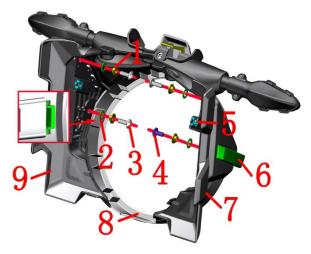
FRONT FORK		Head and headlights component 3	CHK	(0)
